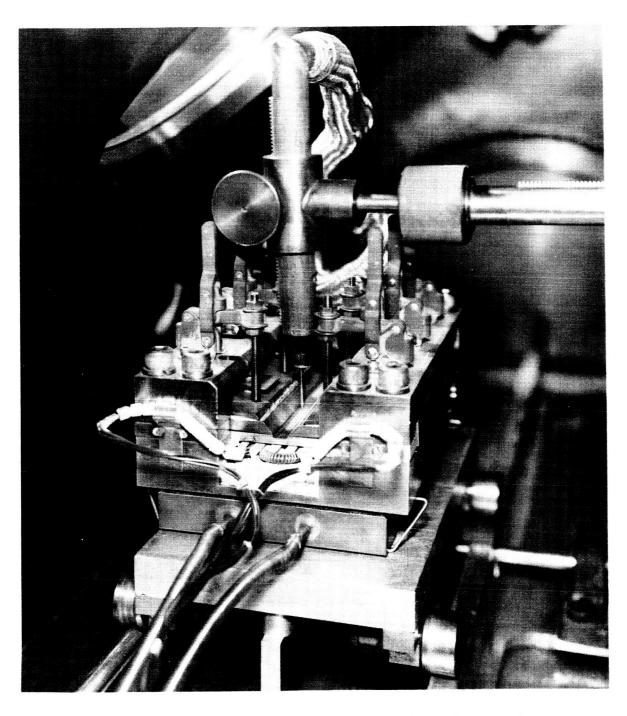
Sheet Welding Fixture Used for Welding Tungsten-Base Alloys with Preheat to 1400°F
